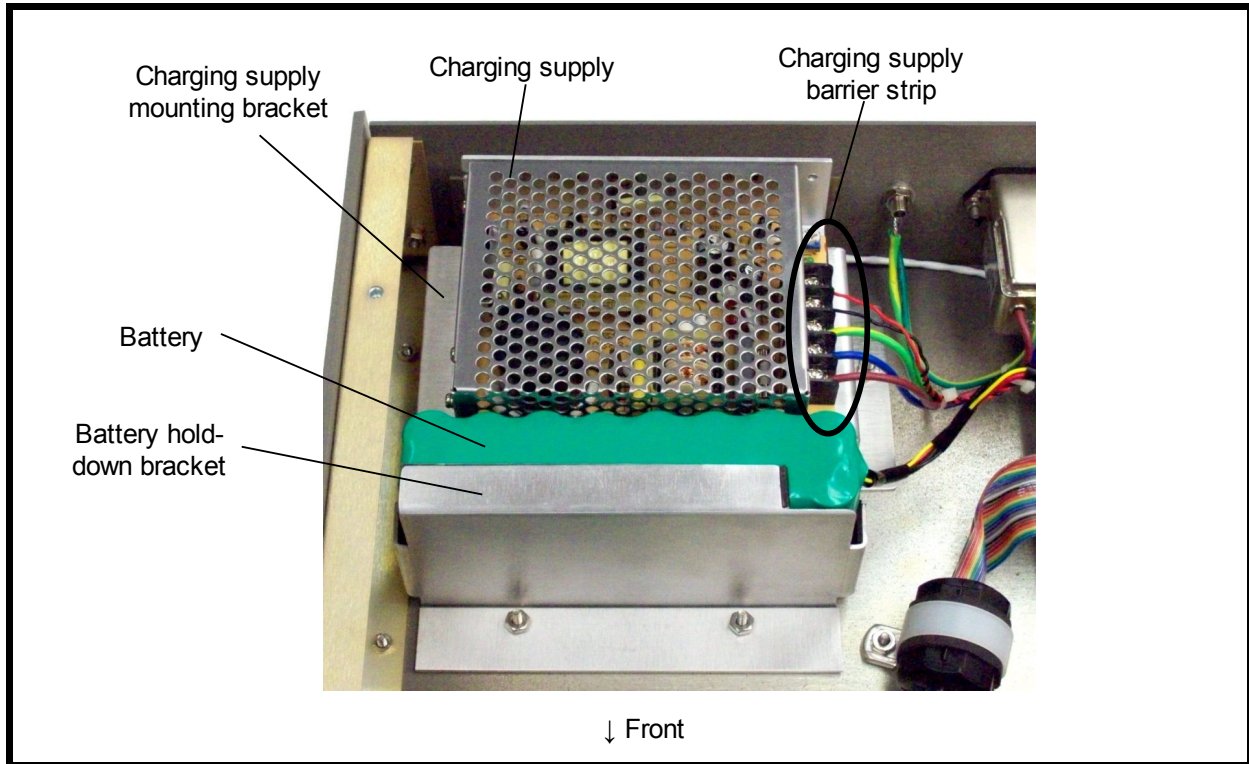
Battery Assembly and Charging Supply (Voltage Guard Removed)
